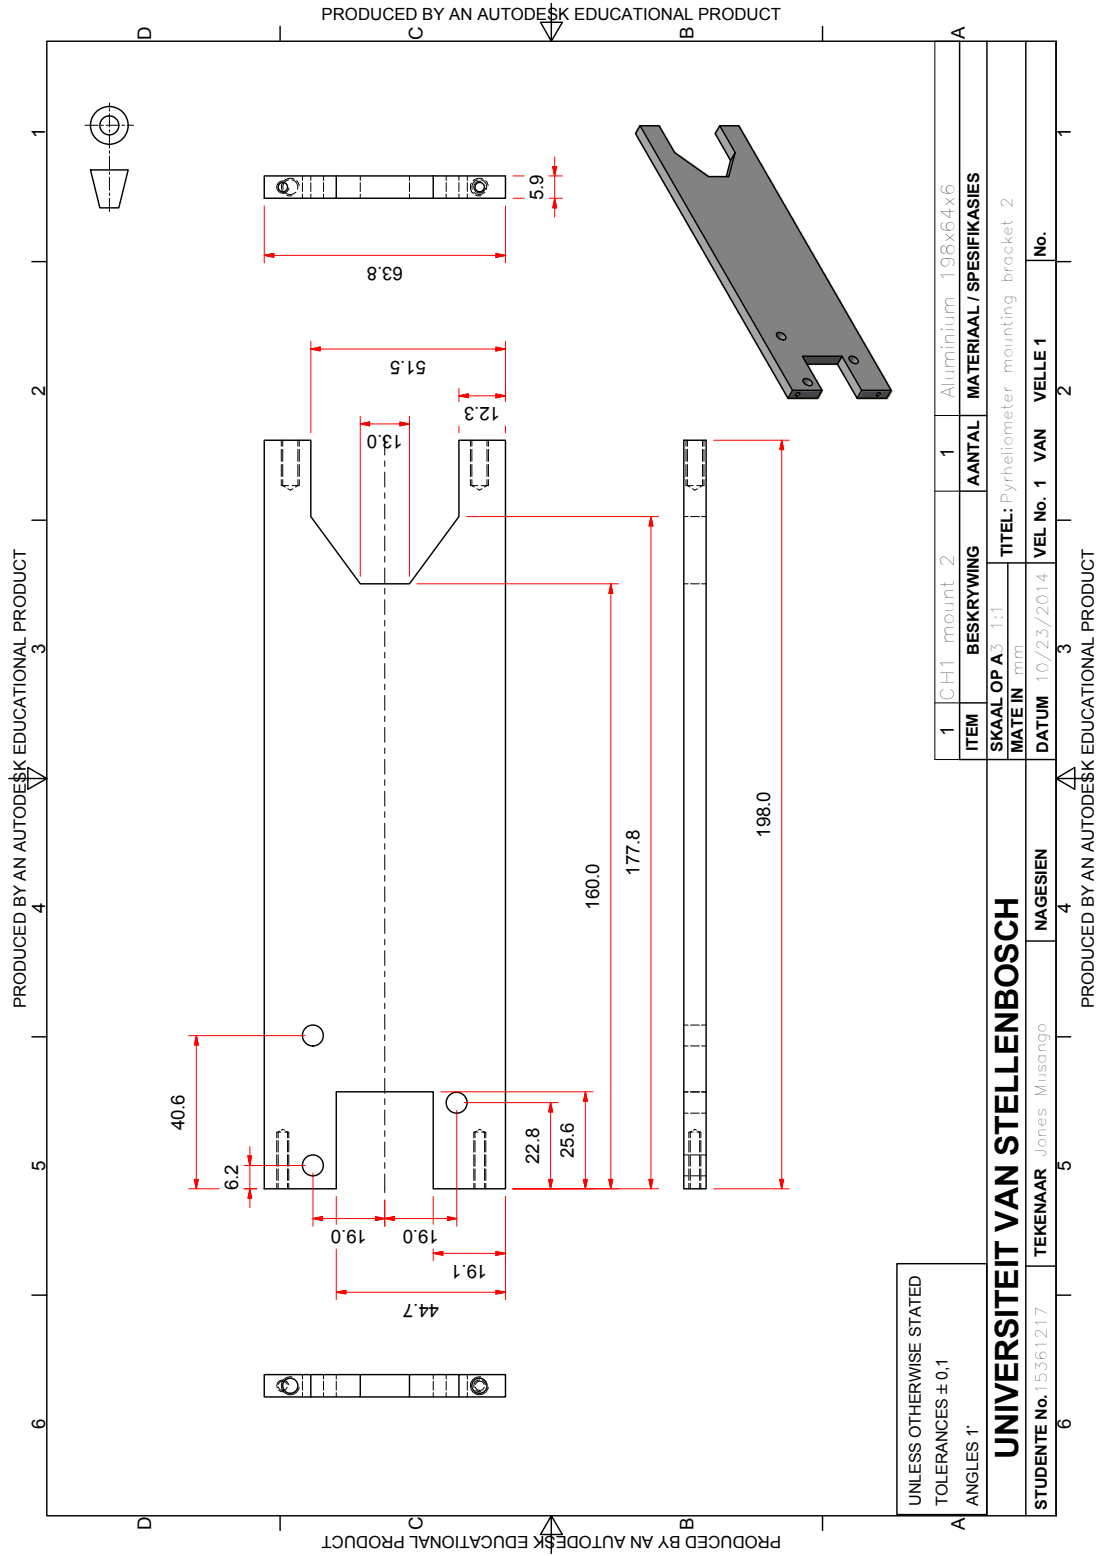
Pyrheliometer (Kipp & Zonnen CH1 mounting Clamp 2
